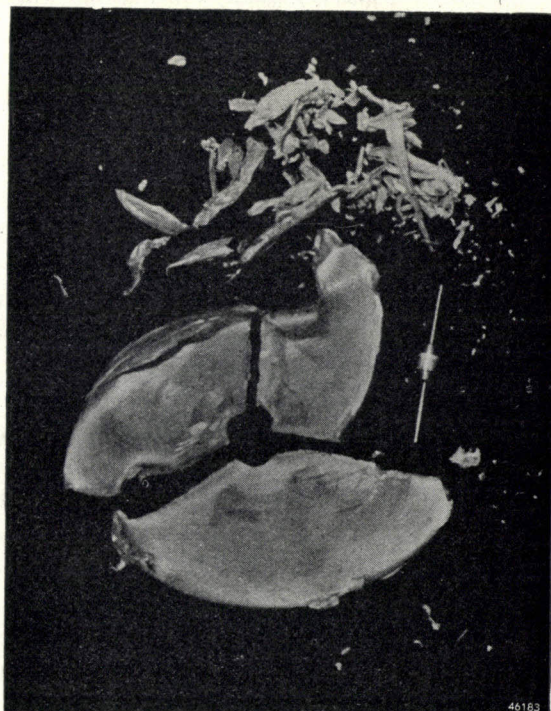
Fragments of a rotating disc which flew to pieces at a peripheral velocity of about 60 000 cm/sec . The photo shows that the fracture began where the spindle passed through.
